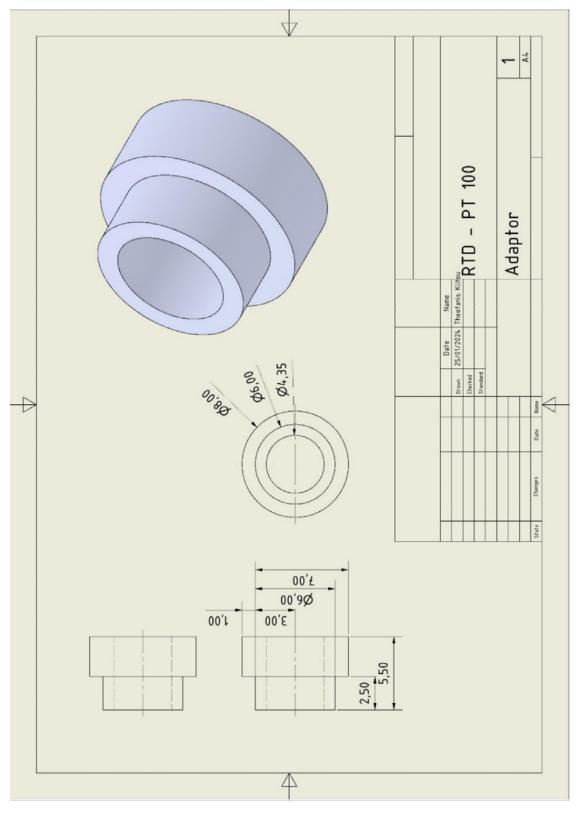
RTD – PT100 Adaptor Drawing (Autodesk Inventor 2024)
